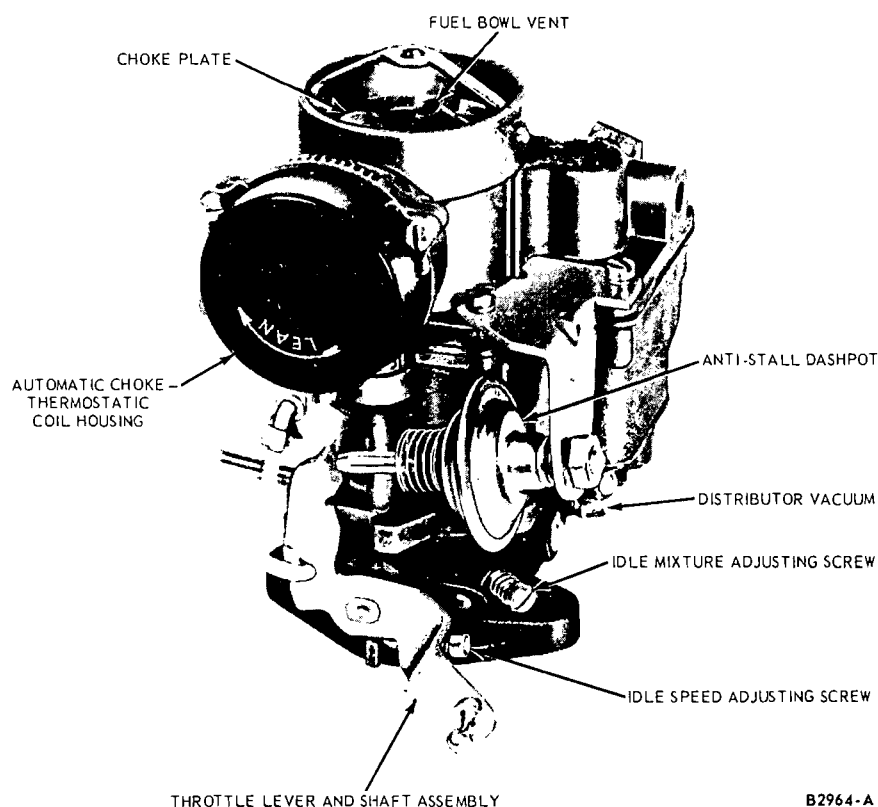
Carter Model YF 1-V Carburetor — Rear View
